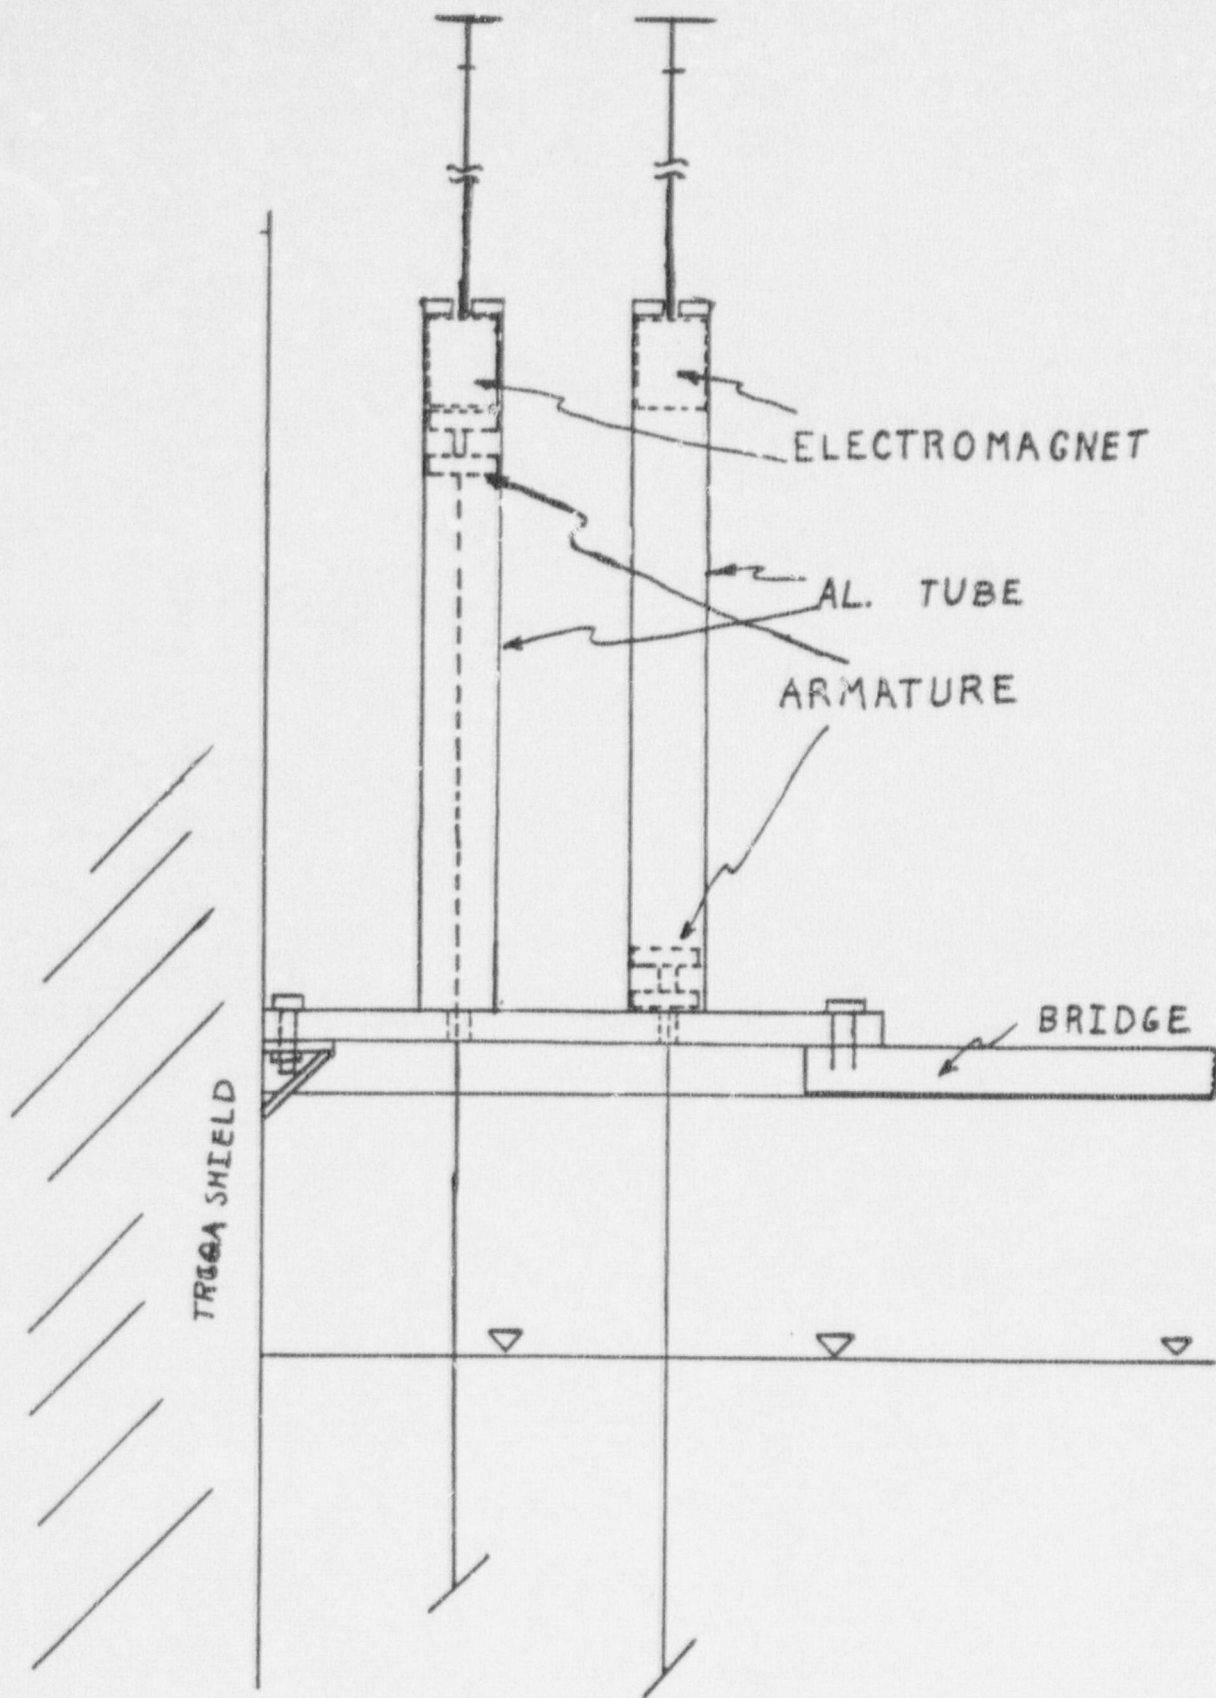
Sketch Showing Cables and Electromagnet Assemblies for the Safety Control Rods
